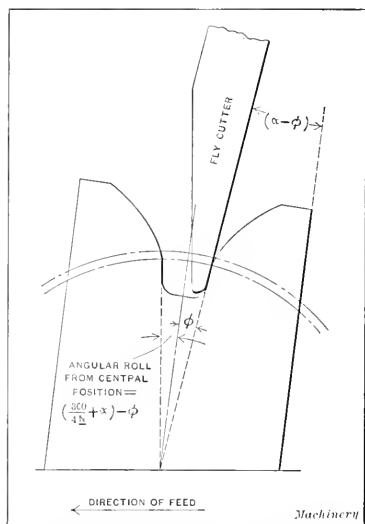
Diagram showing Angular Relation between Fly Cutter and Forming Tool at Conclusion of Roll to give the Proper Radial Flank
